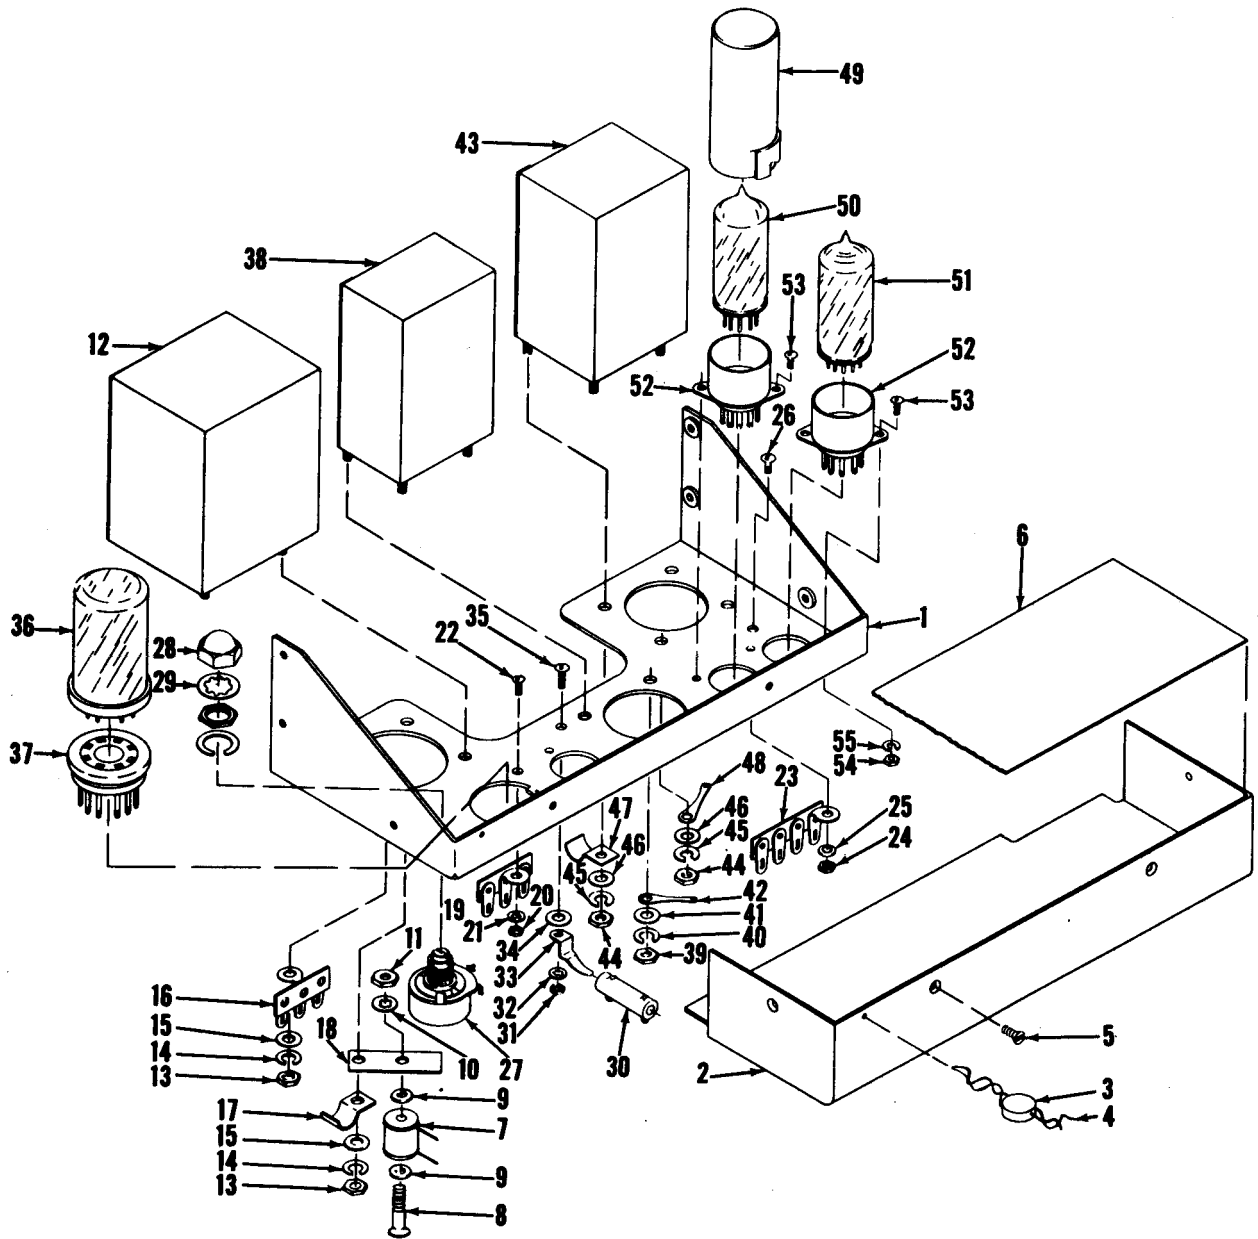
Oscillator Amplifier Assembly (Sheet 1 of 2)
